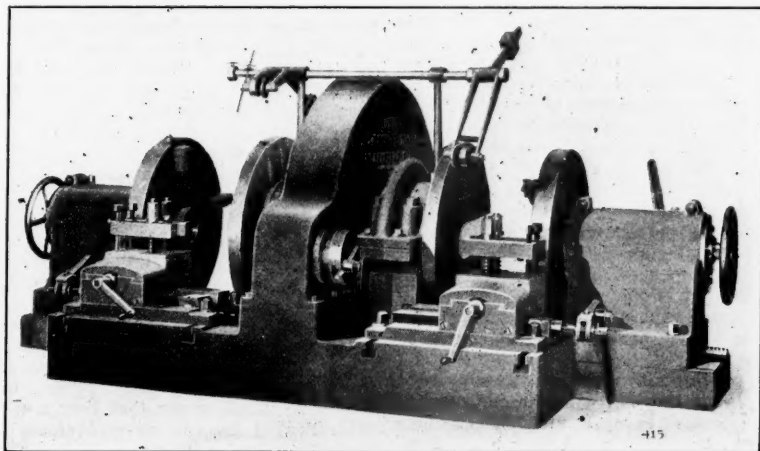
Niles-Bement-Pond Car Wheel Lathe.
